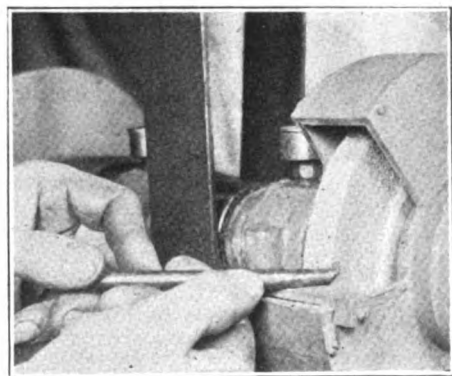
Most of Grinding of Boring Tool Done on Side and Edge of Wheel.
